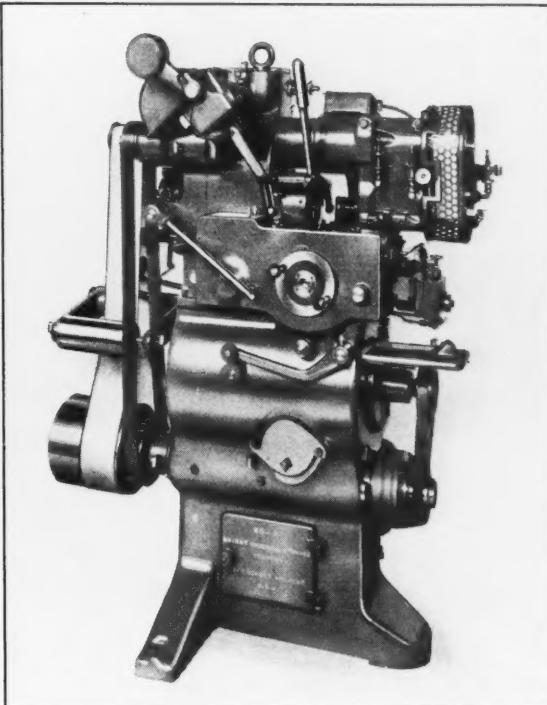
Bryant Chucking Grinder with Electrical Sizing Device
